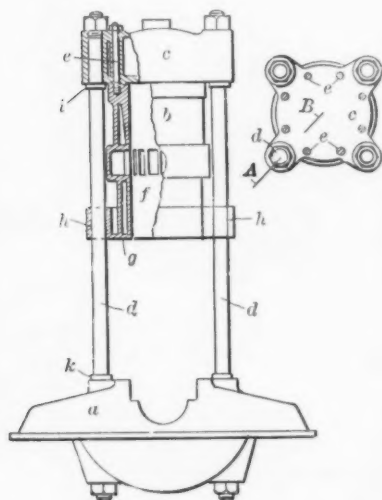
SECTIONAL DRAWING SHOWING CYLINDER OF 2000 H.P. (DESIGN BY SULZER BROTHERS)
